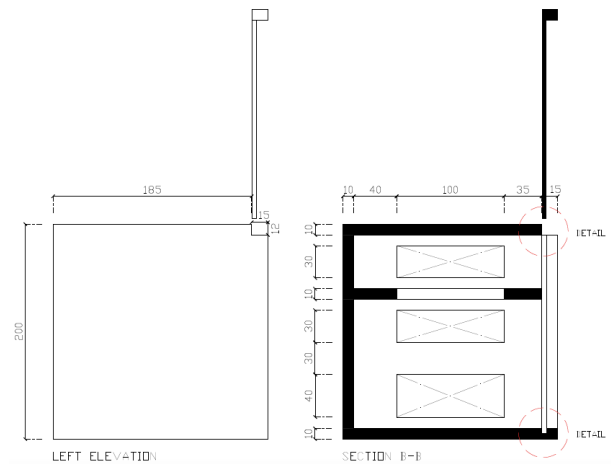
Left Elevation and Section B-B view of ID-QUBE
